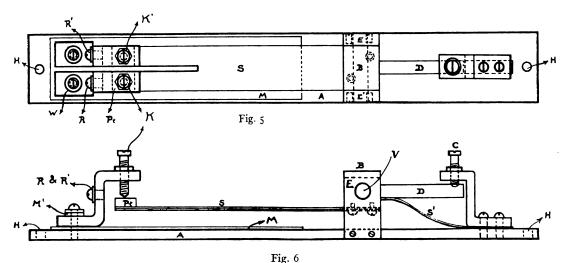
Thermo-regulator, plan. Fig. 6.—Thermo-regulator, side elevation
